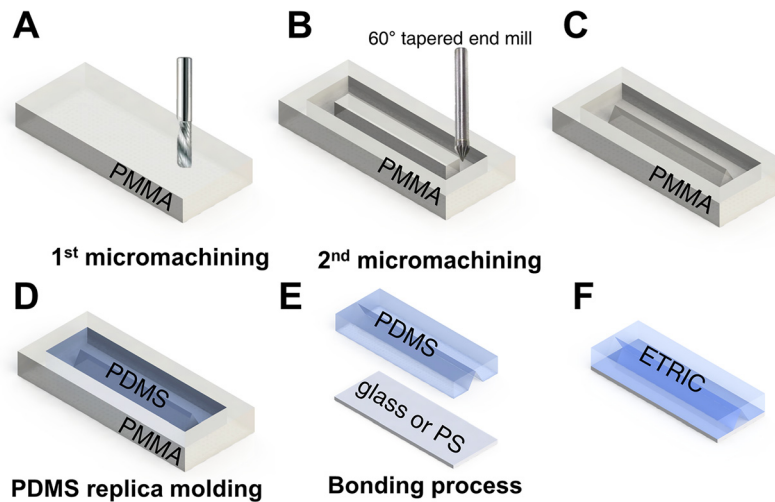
Schematic for the fabrication of equilateral triangular channel (ETRIC). (a)–(c) Two-step micromachining to fabricate the master mold with a standard end mill and a 60° tapered end mill with a precisely controlled milling path. (d) PDMS replica molding to replicate the PDMS ETRIC. (e) Bonding process of the PDMS ETRIC to the glass substrate. (f) Fabricated ETRIC on the glass substrate
